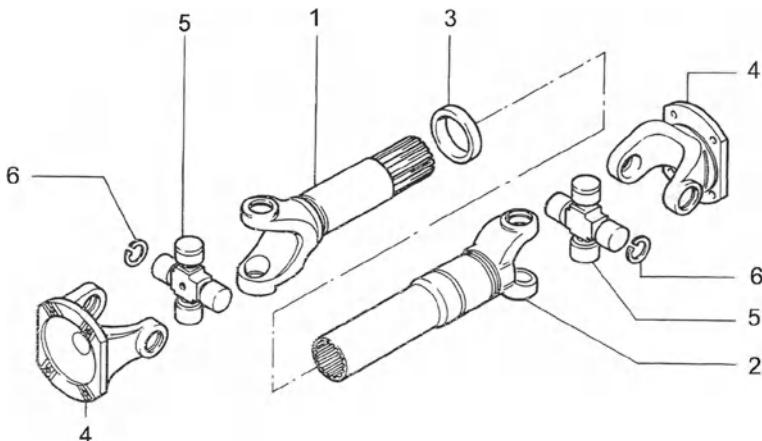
Exploded view of the moving part of a propeller shaft with universal Hooke joints (from Genta and Morello 2009)
